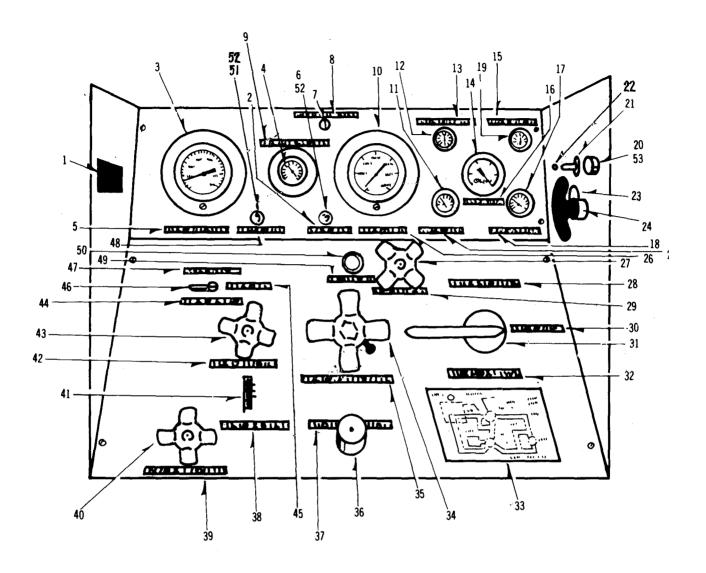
Control Panel and Instrument Assembly (Front View)
